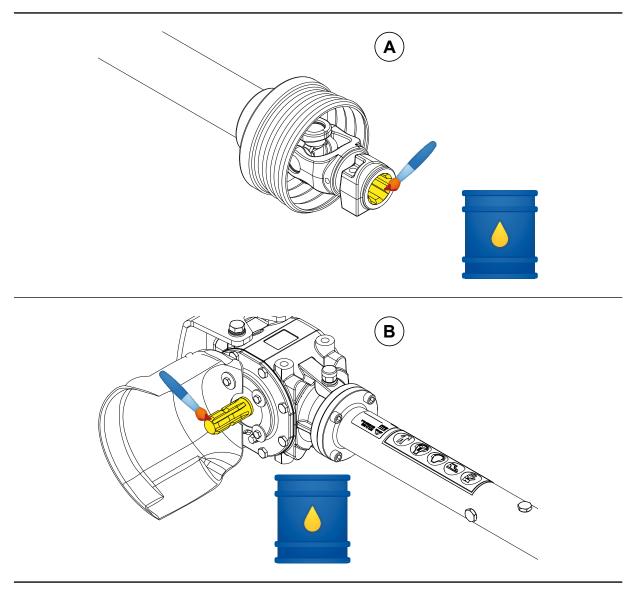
Carefully clean and lubricate the cardan shaft coupling and the PTO shaft
